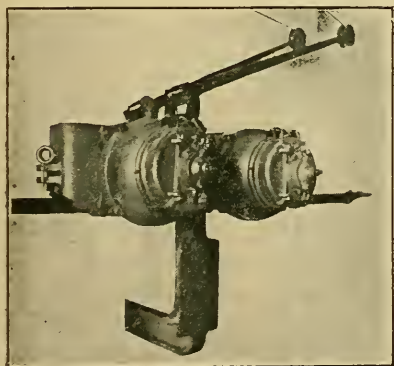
FRONT VIEW. SIDE BEARING. DOUBLE TROLLEY.
